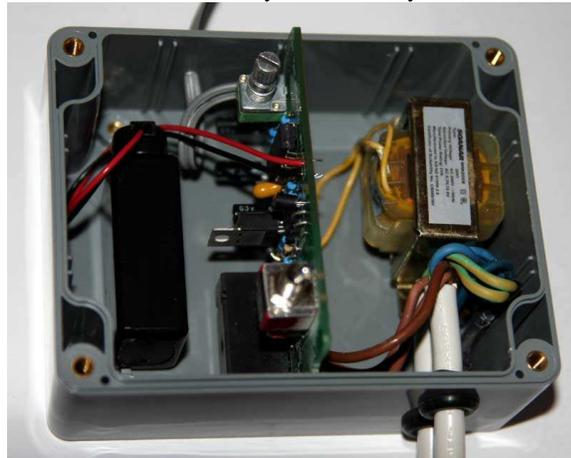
Inside the assembled thermostat. The thermostat enclosure is waterproof. Right: transformer. Left: the 9V NiMh battery.
